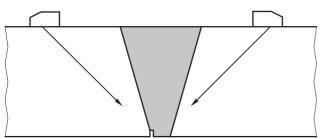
Location of notches and beam angles for the examination of welded joints on austenitic steels
